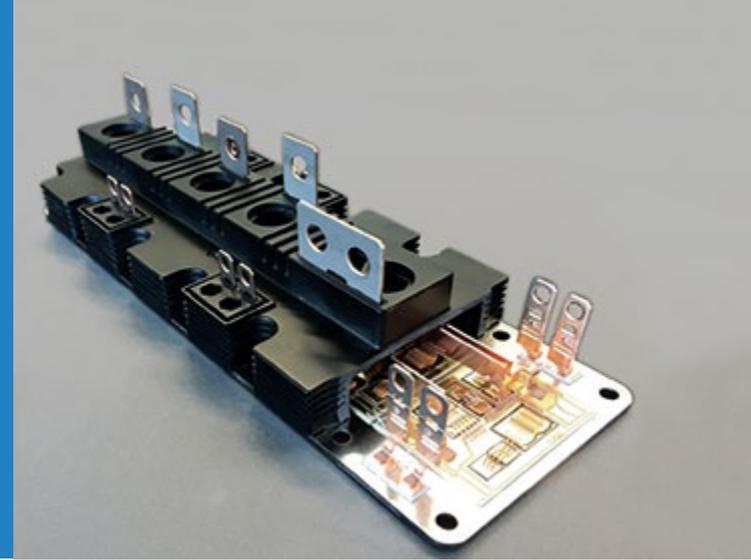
P3L power module with Cu wire bonding in DBB assembly technique (Danfoss Silicon Power)
